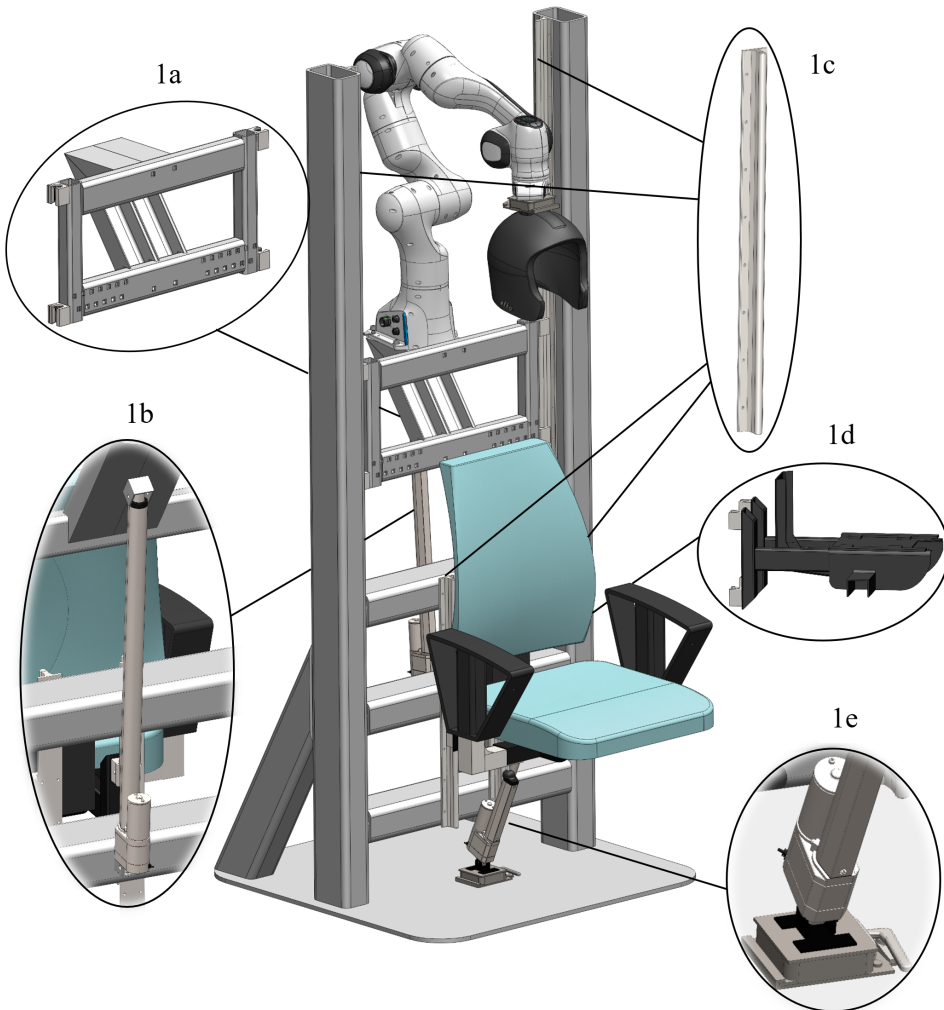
Assembly of Hybrid design, seated version, with the custom made base fixture (1a), linear actuators (1b, 1e), linear rails(1c) and chair fixture plate.
